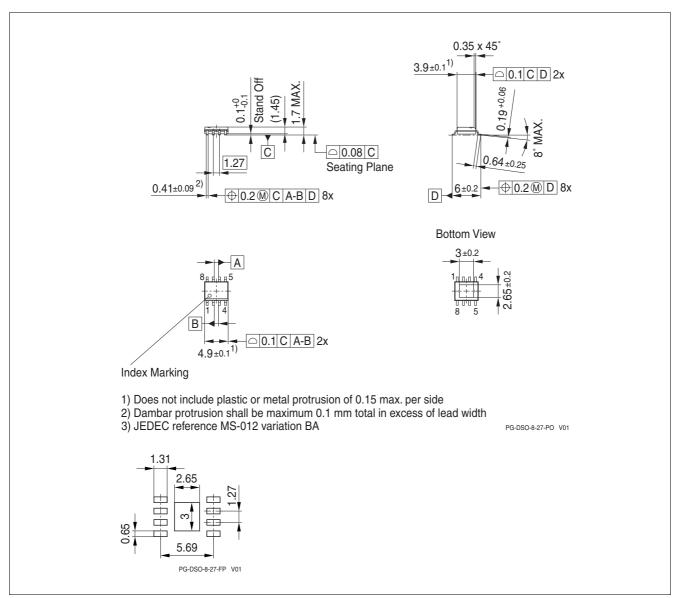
PG-DSO-8 (exposed pad) Outline and recommended footprint for reflow soldering
